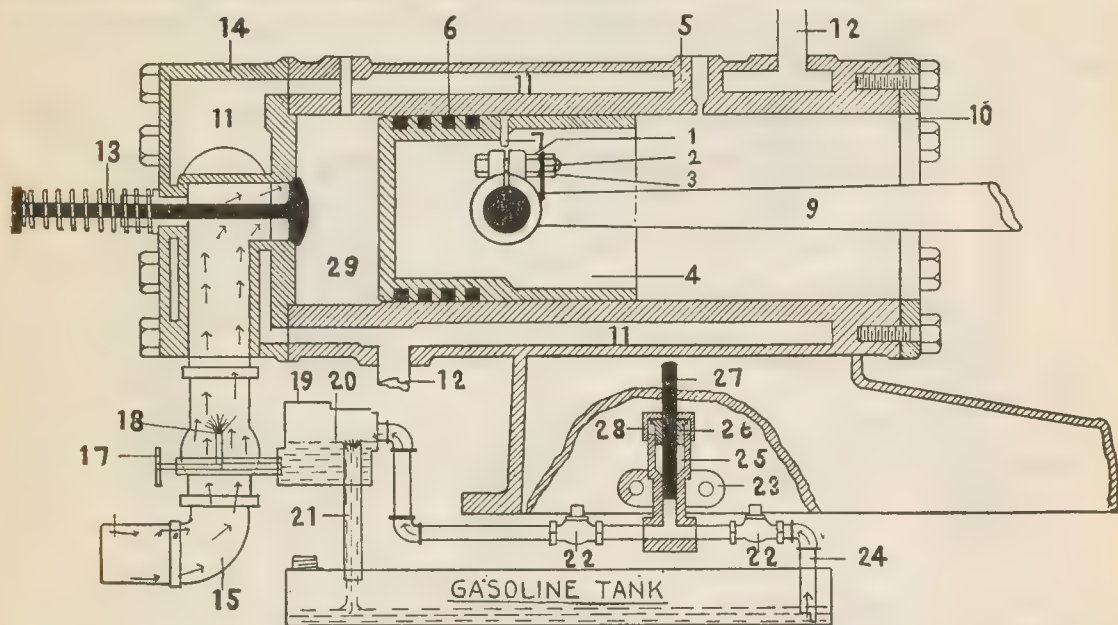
,112.—Sectional view of Gilson four cycle gasoline engine cylinder. *The parts are:* 1, adjusting nut; 2, lock washers; 3, jam nuts; 4, piston; 5, cylinder; 6, piston rings; 7, piston bearing oil tube; 8, piston bearing; 9, connecting rod; 10, cylinder packing ring; 11, water jackets; 12, water inlet and outlet; 13, intake valve; 14, cylinder head; 15, intake pipe; 16, gasoline needle valve; 17, gasoline feed pipe; 18, gasoline reservoir; 19, gasoline level; 20, overflow pipe; 21, check valves; 22, gasoline pump; 23, gasoline suction pipe; 24, pump packing; 25, packing gland; 26, pump; plunger; 27, packing gland regulating nut.
